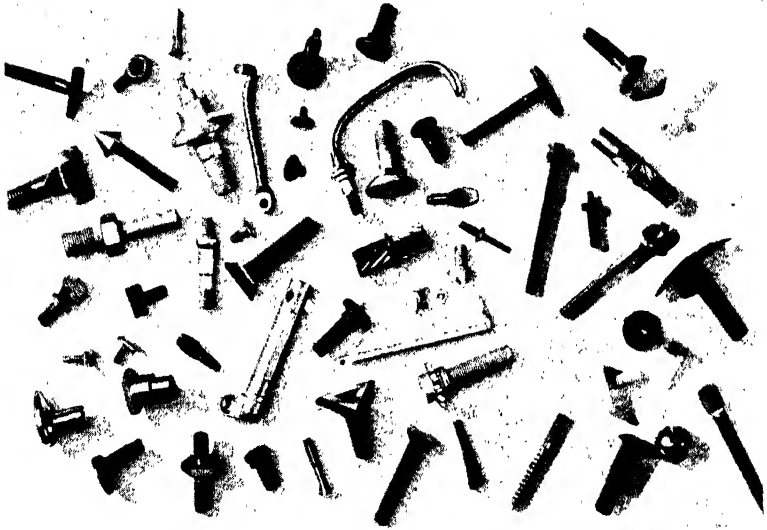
Assortment of parts virtually all of which are produced by cold heading. Nearly all are special and involve one or more secondary operations, including a cut or rolled threading.
